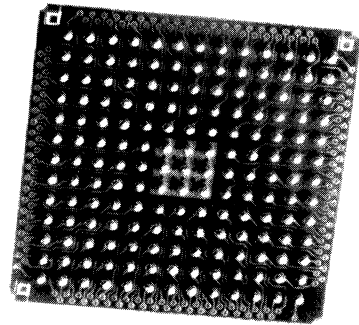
169–lead OverMolded Pad Array Carrier (OMPAC) Saves Board Space and Improves Manufacturing Yields
